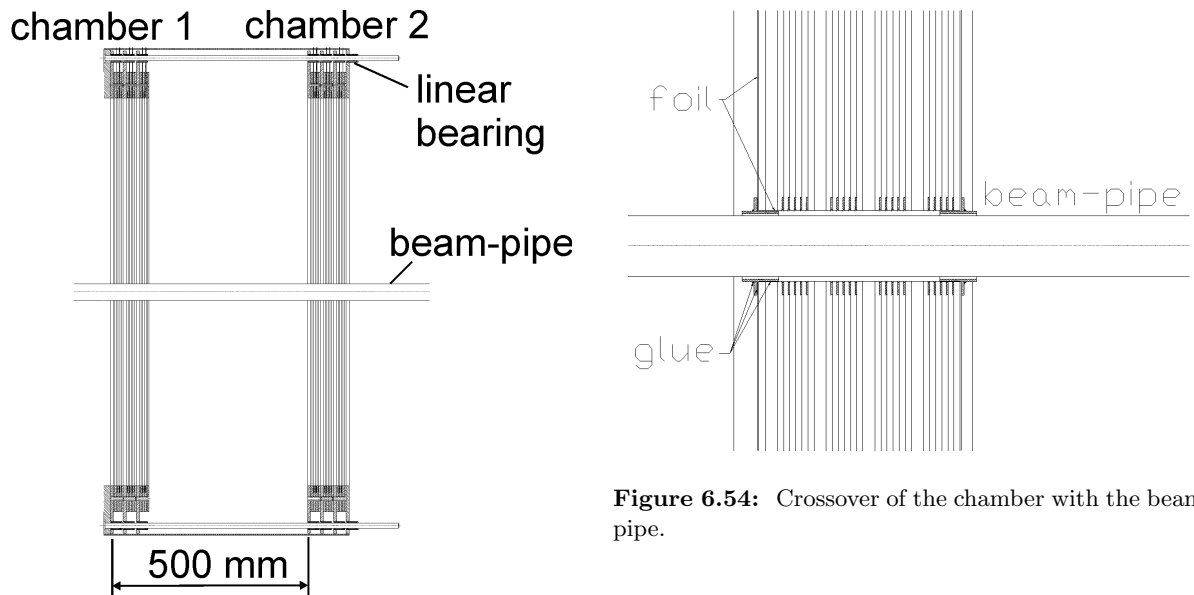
Setup of two chambers – DC5–DC6 mounted on linear bearings.
